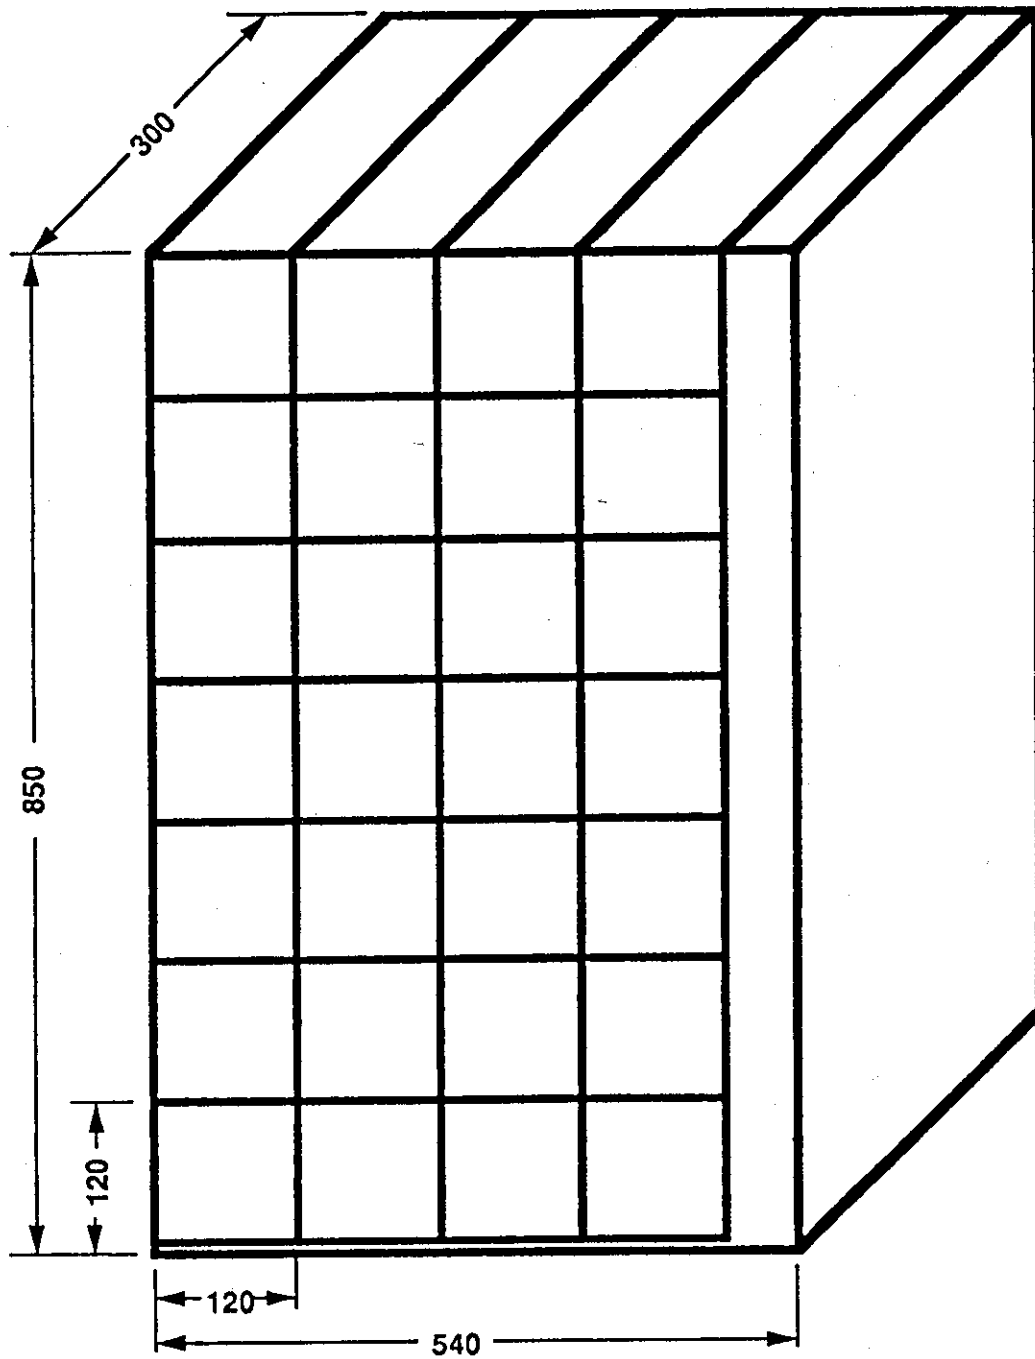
Cutting plan for the blocks from which specimens were machined.
